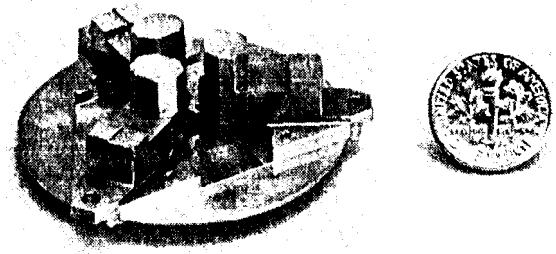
Tilt mechanism machined from a monolithic block of Invar 36.
